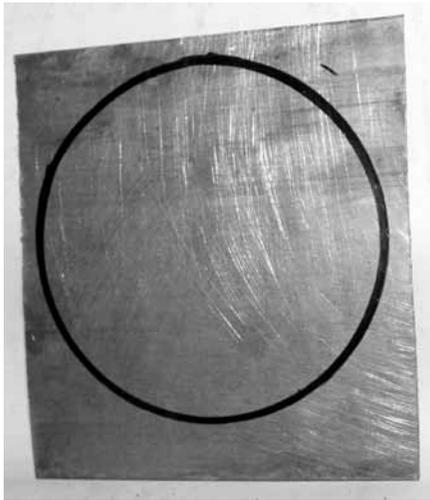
Using the cylinder end, scribe a circle onto the PC board.
